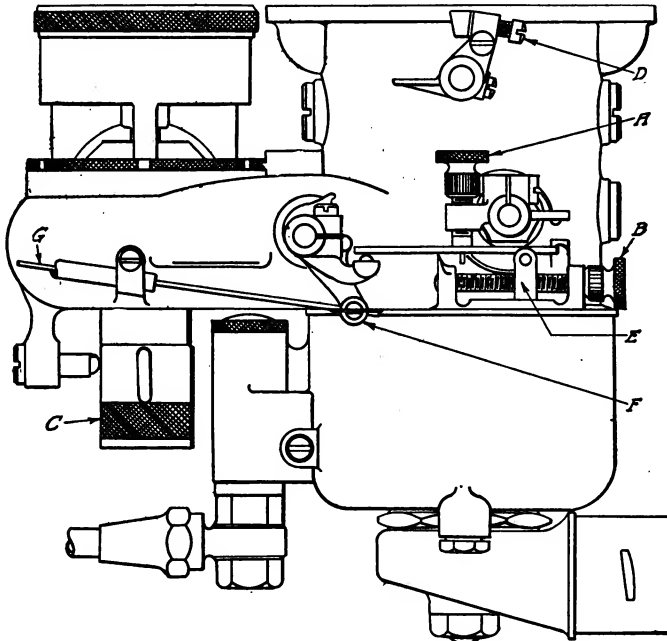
External View of Webber Carburetor, Showing Adjustments
